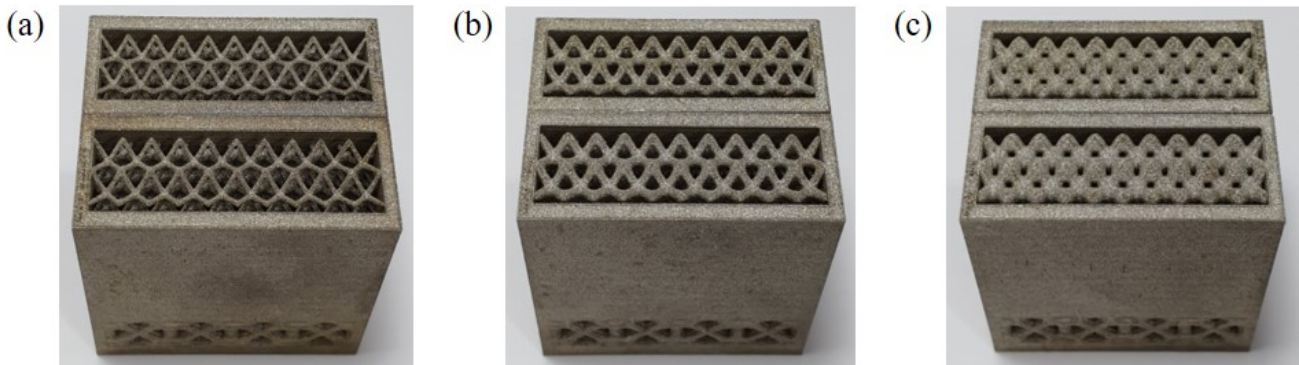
(a) Heatsink 1. (b) Heatsink 2. (c) Heatsink 3. Heat exchanger parts manufactured in three different internal lattice sizes
